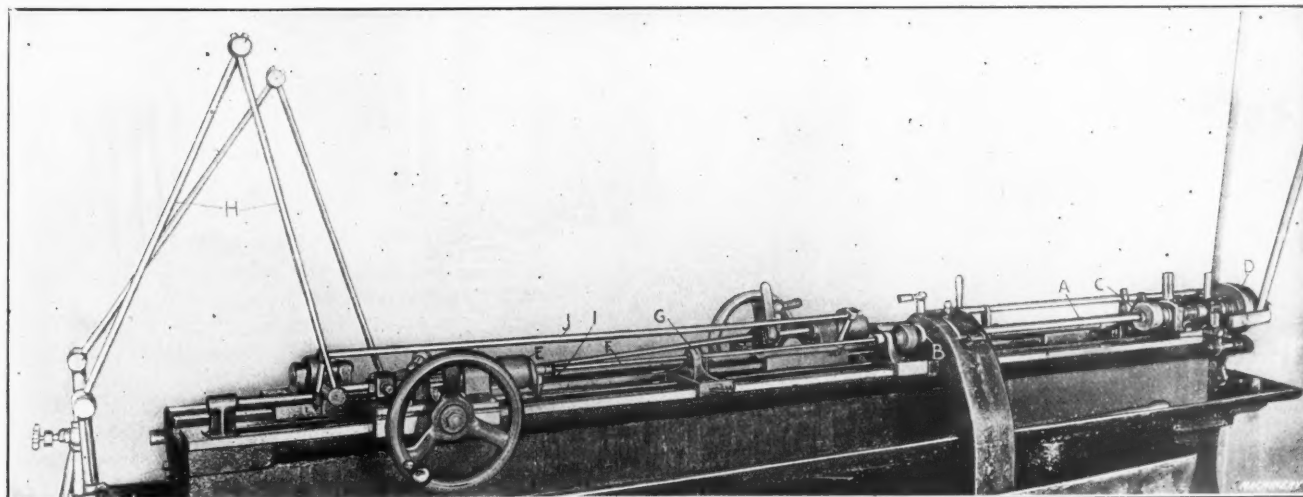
Drilling Barrels in Pratt & Whitney Barrel Drilling Machine
